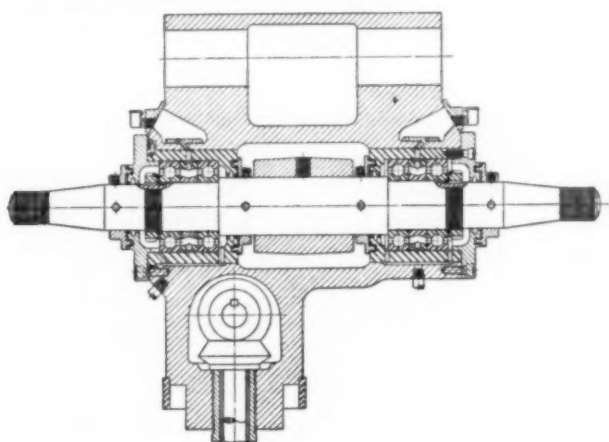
GRINDING-MACHINE SPINDLE EQUIPPED WITH BALL BEARINGS
